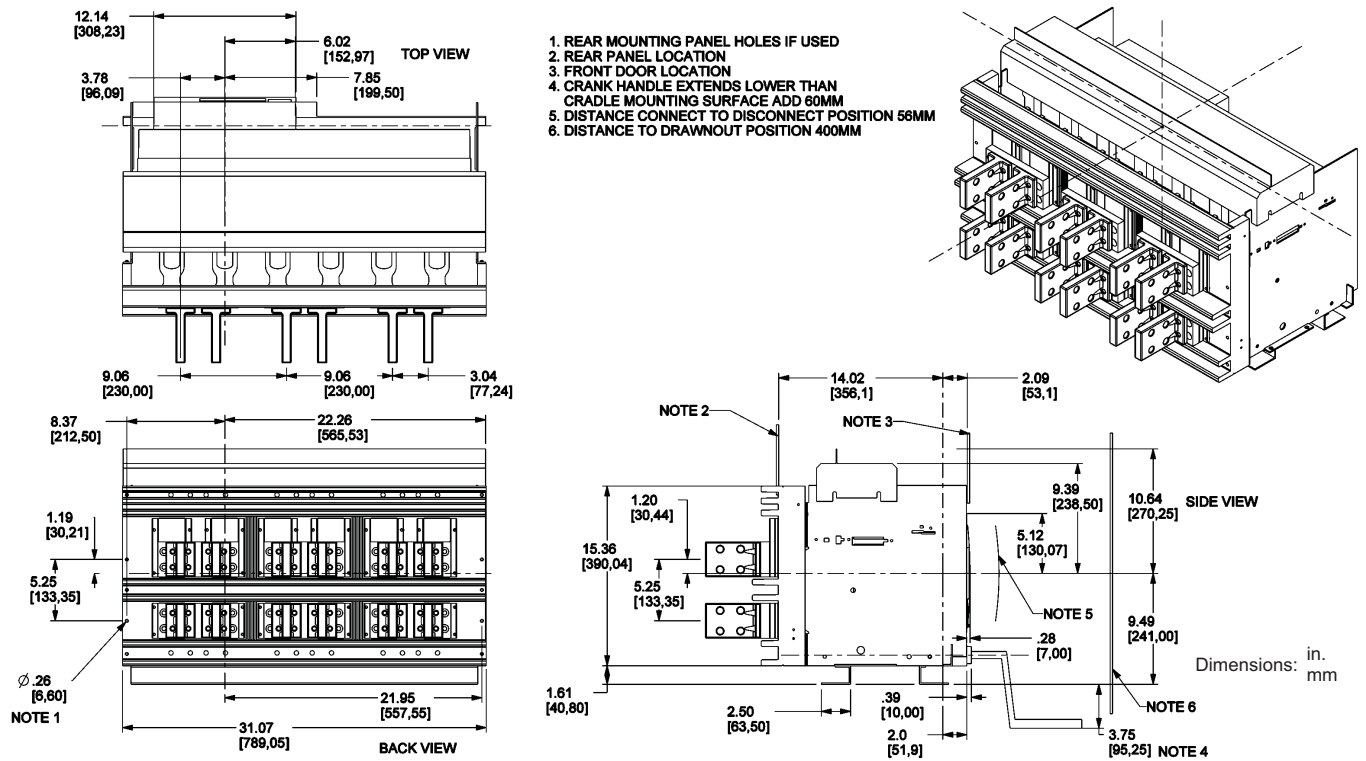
3200 A L1 and 4000–6000 A Master Drawing
